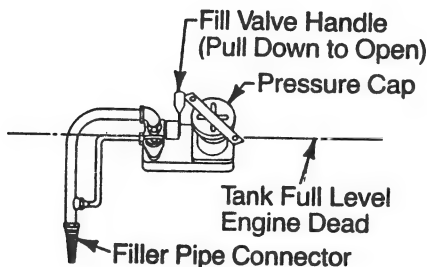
Cooling Pressure Cap and Filler Relief Arrangement
